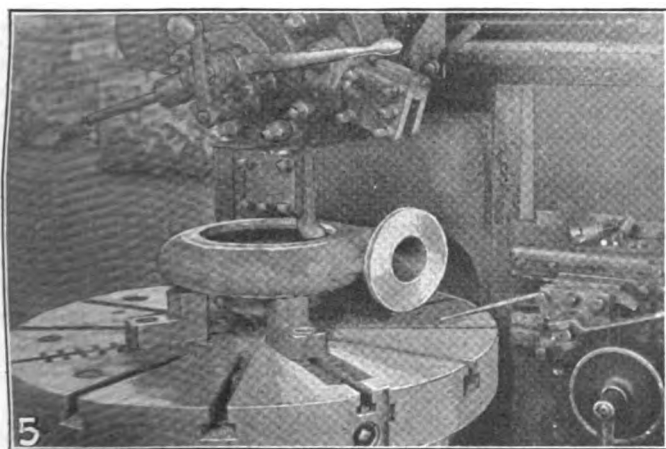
BORING OUT A PUMP CASING. FIG. 6. MILLING COMBINED ELBOW CHECK VALVES
